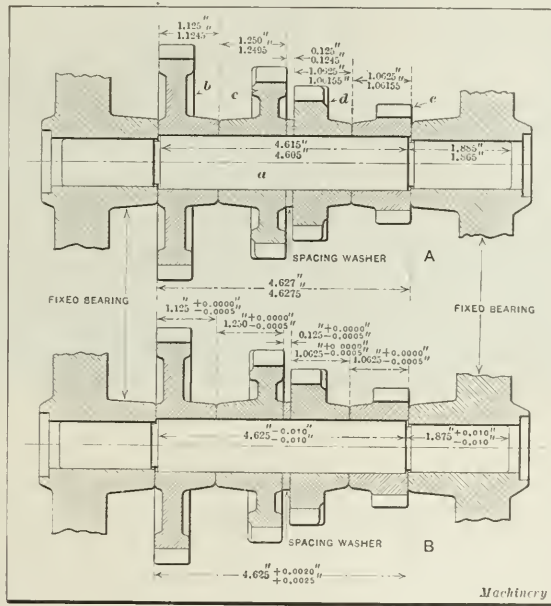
Diagram illustrating Two Methods of dimensioning Drawings
